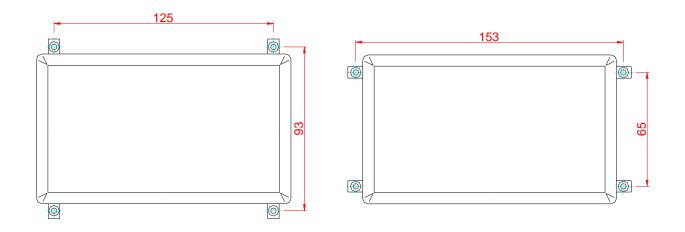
Mounting drill dimensioning (all dimensions in mm)
